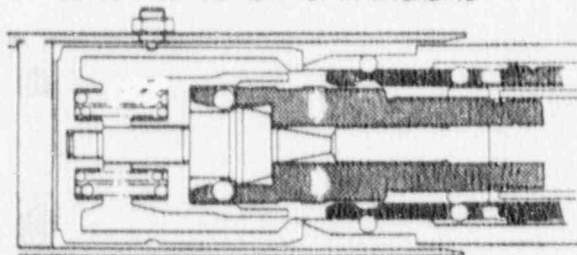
FUELING MACHINE 'C' RAM TAPE DRIVE ASSEMBLY
